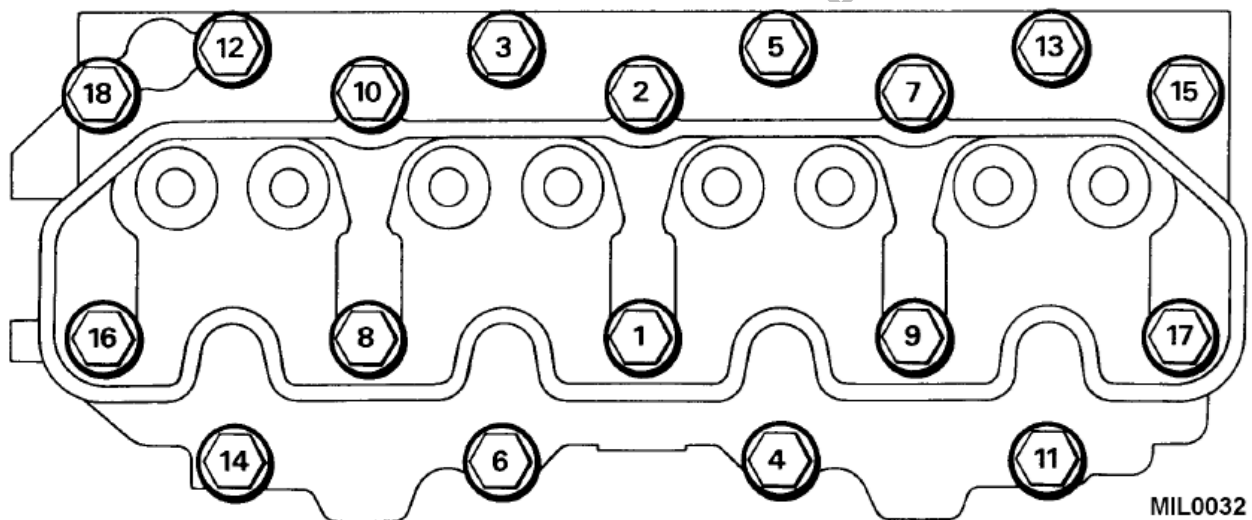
Bolt locations and Tightening sequence for cylinder head.
